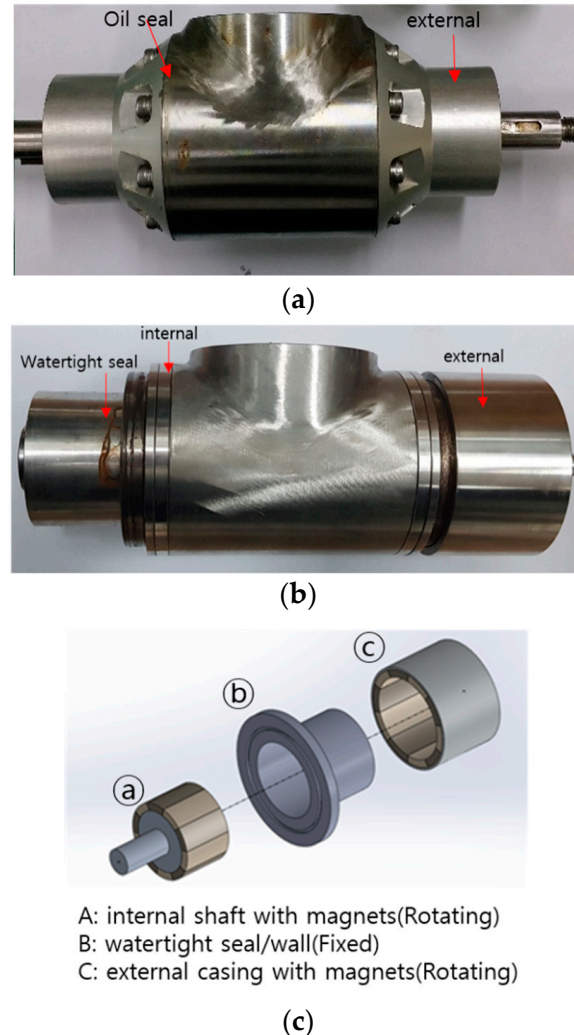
(a) Previous Turbine’s mechanical oil seal coupling; (b) assembly of magnetic coupling; (c) a SolidWorks rendering of magnetic coupling.
